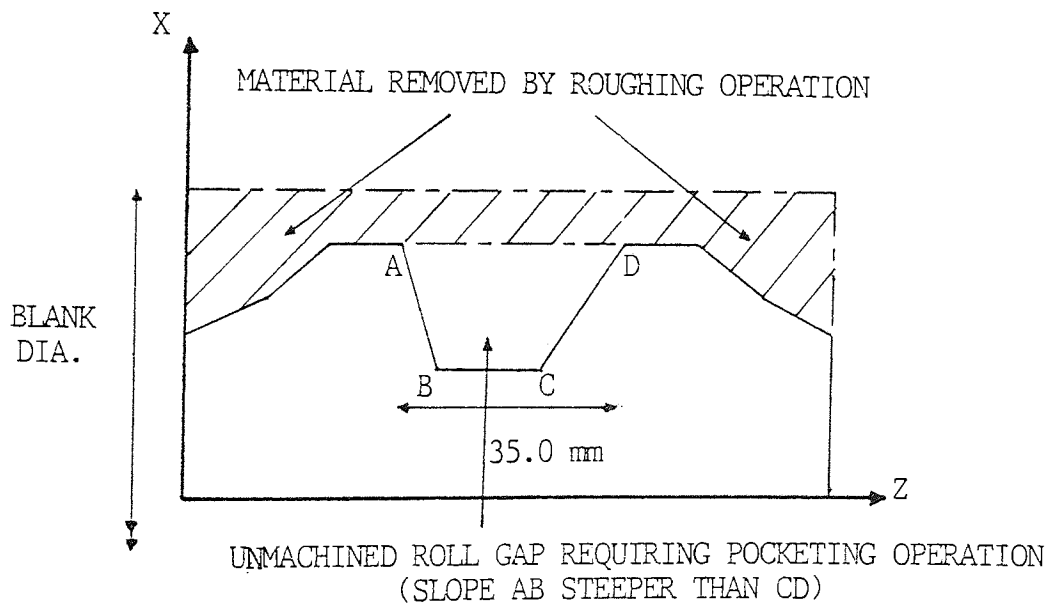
ROLL PROFILE REQUIRING A RIGHT HAND POCKETING TOOL
